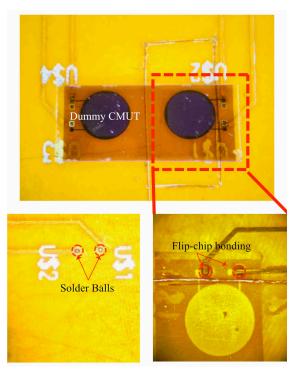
Optical image of a flip-chip bonded dual CMUT (top), solder balls attached to an FPCB after reflow (bottom left), and the zoomedin active CMUT (bottom right).
